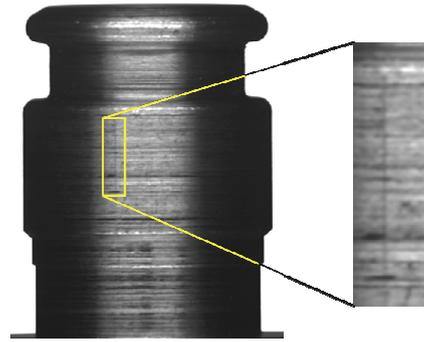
Image of the surface of hydraulic fitting acquired with an area scan camera. The zoom frame shows the enlarged surface defect
